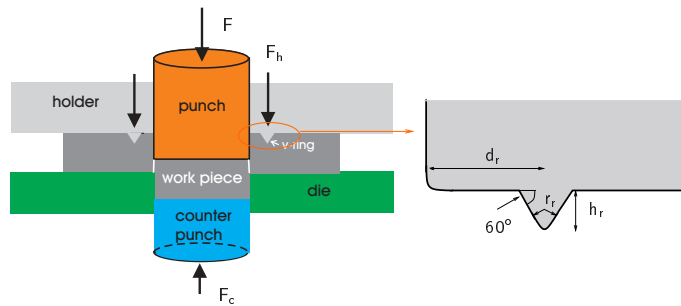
(left) Fine blanking setup. (right) v-ring dimensions.
